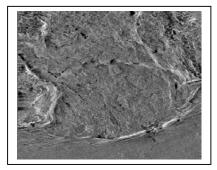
Fracture surface of notched carbon steel sample exhibiting SCC
